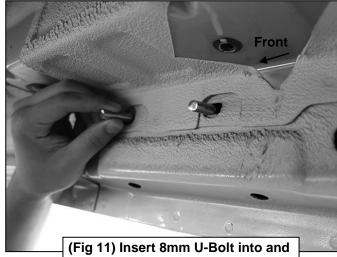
Locate the #2 mounting location for Bracket. Insert 8mm U-Bolt into and out factory holes in body panel
